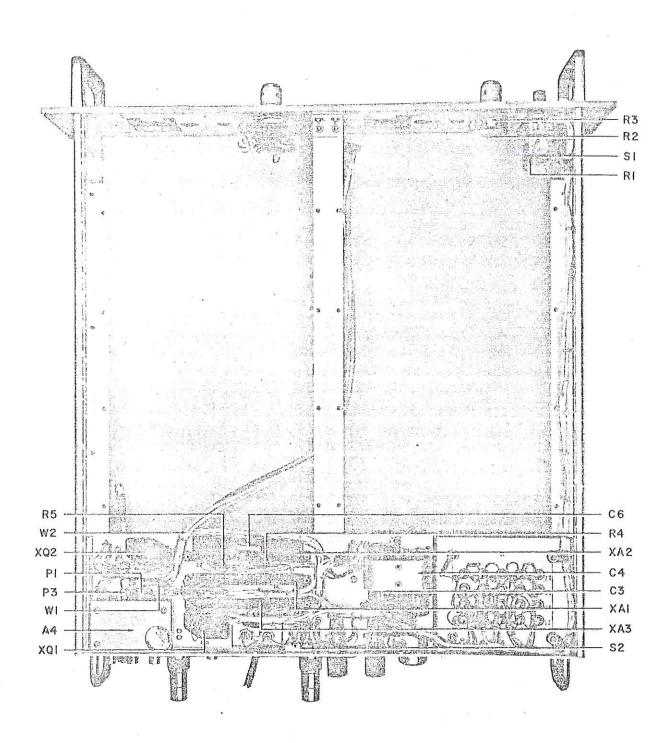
Type MTF-100A Microwave Tuning Frame, Bottom View, Location of Components.
